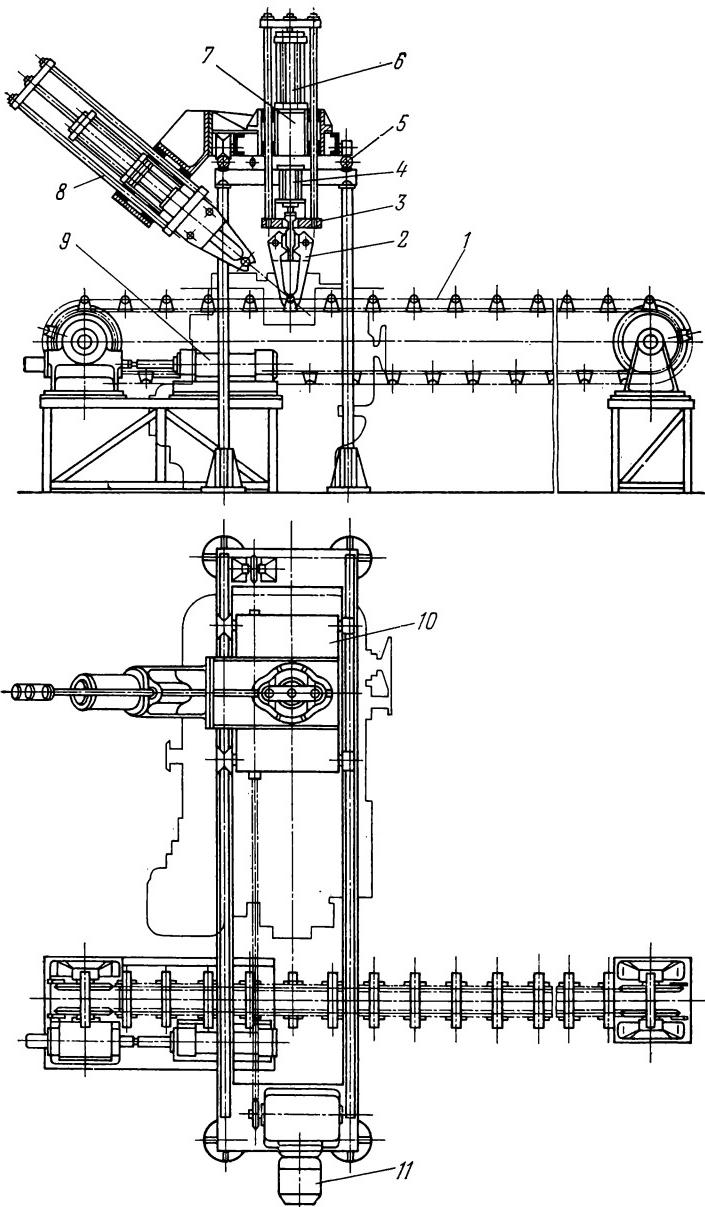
Top loading of shafts into a multiple-tool semiautomatic lathe:
